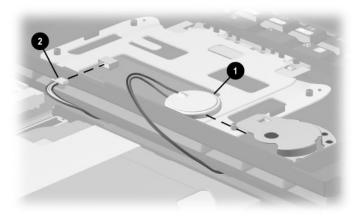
Removing the RTC Battery and Disconnecting the TouchPad Cable
